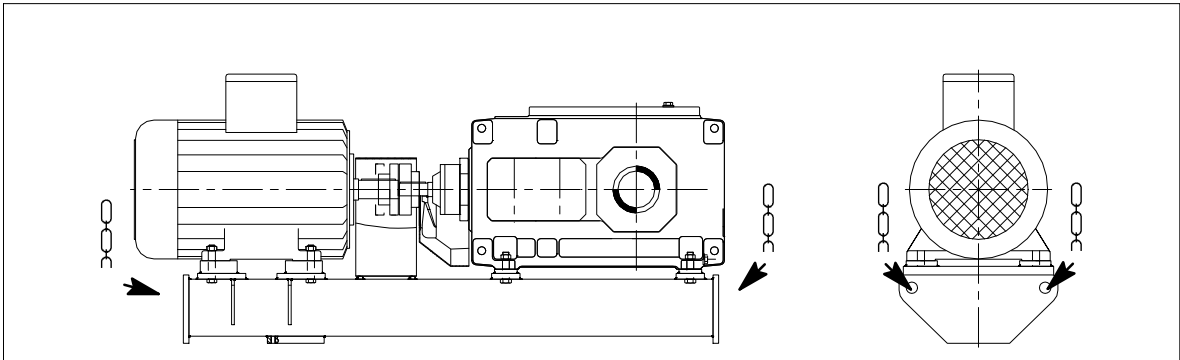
Attachment points on gear units types B... with gear-unit swing base
